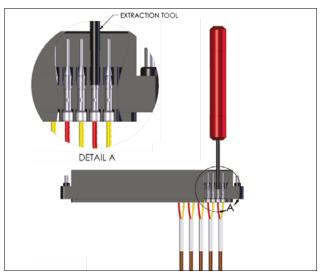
Figure B. Ensure that the tool is kept perpendicular to the module face to avoid damage to the contact or tool.
